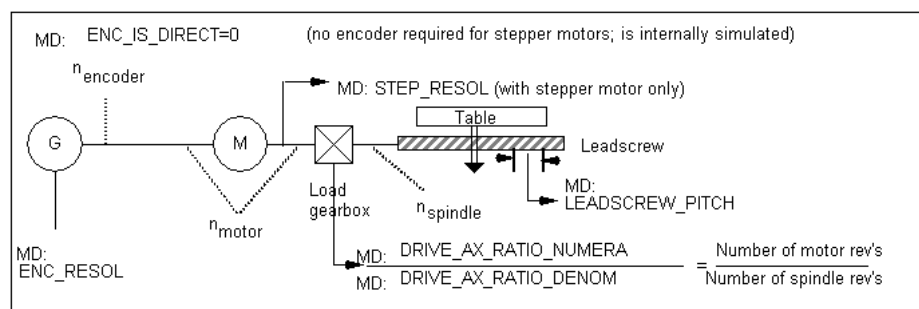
Example: Linear axis with rotary encoder mounted on the motor
